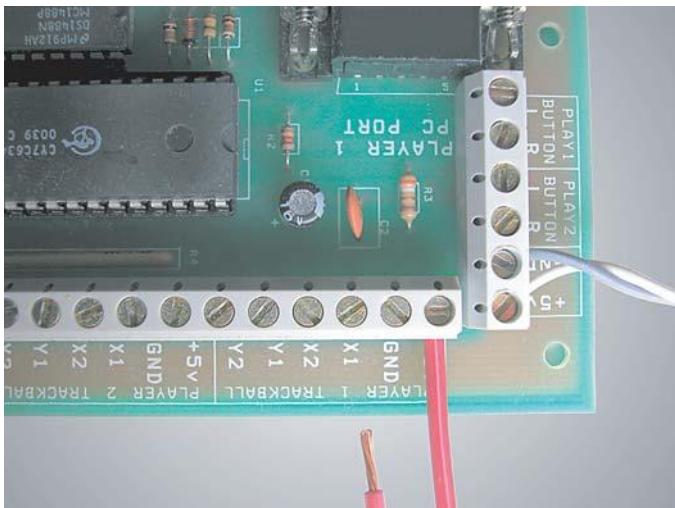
Attaching wires to the screw terminal block on an interface.
